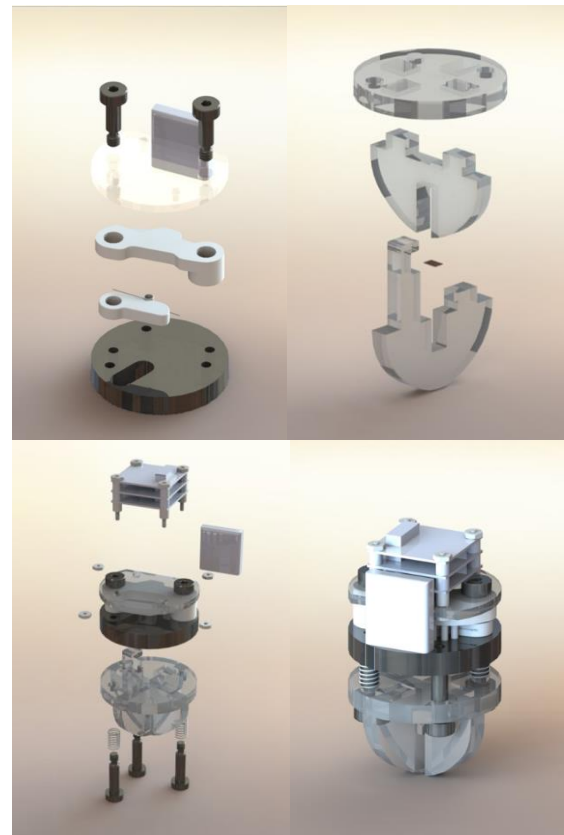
(Top Left) Upper assembly exploded view showing the positioning of the latch and support plates. (Top Right) Bottom assembly exploded view displaying the pin connection that interlocks with the latch. (Bottom Left) Exploded view of FAS showing the positioning between the upper and lower sections. (Bottom Right) Fully assembled FAS render.
